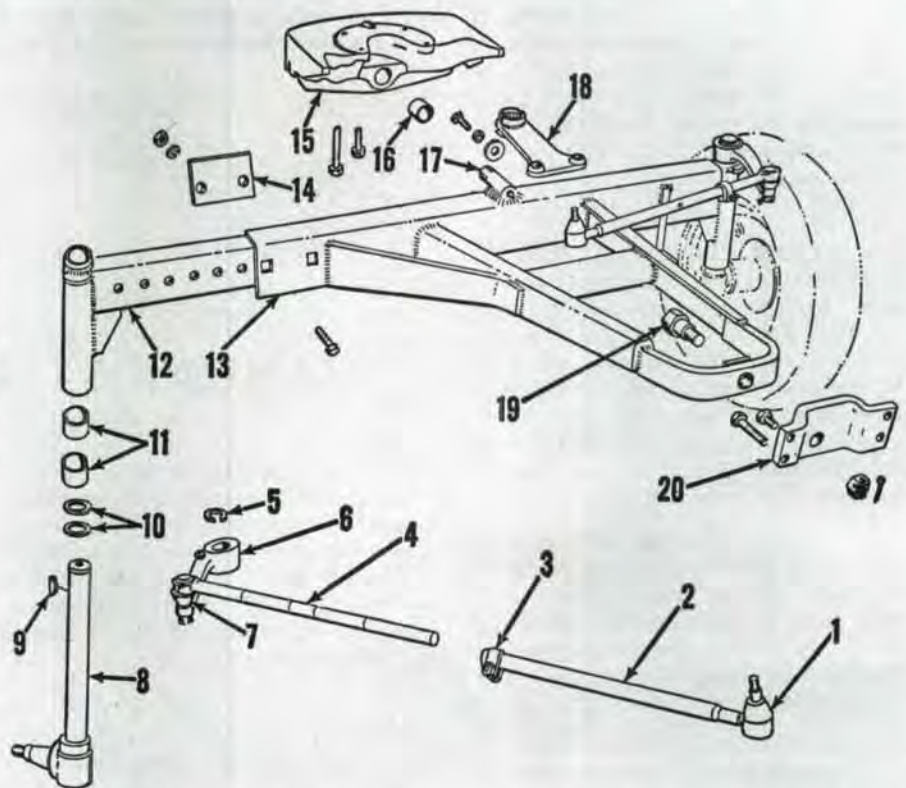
Exploded view of adjustable front axle assembly and associated parts. Center (main) member and radius rod (13) is a welded assembly.
